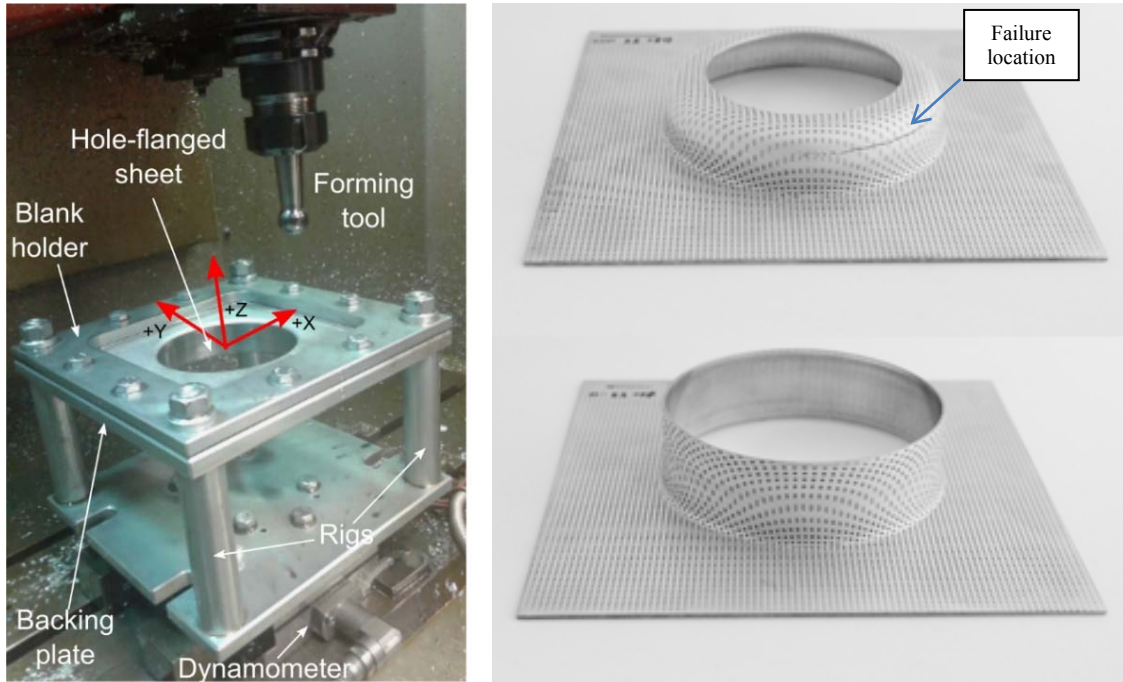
Experimental setup for SPIF tests (left); Fractured flange ($\phi 63.5$ mm pre-cut hole) and successful flange ($\phi 65$ mm pre-cut hole) obtained using a $\phi 12$ mm forming tool (right).
